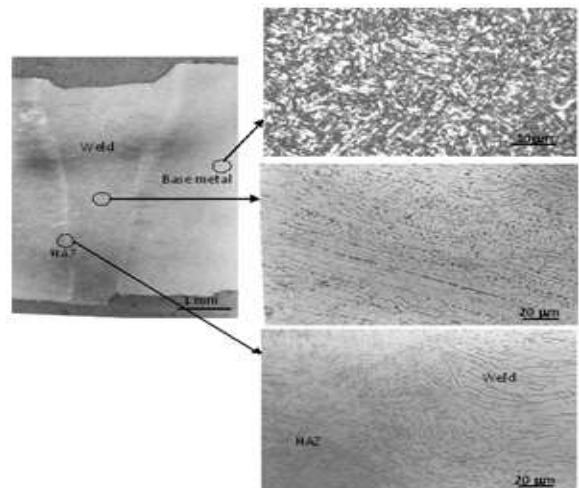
Electron beam weld and its cross sectional view (as-welded condition)
